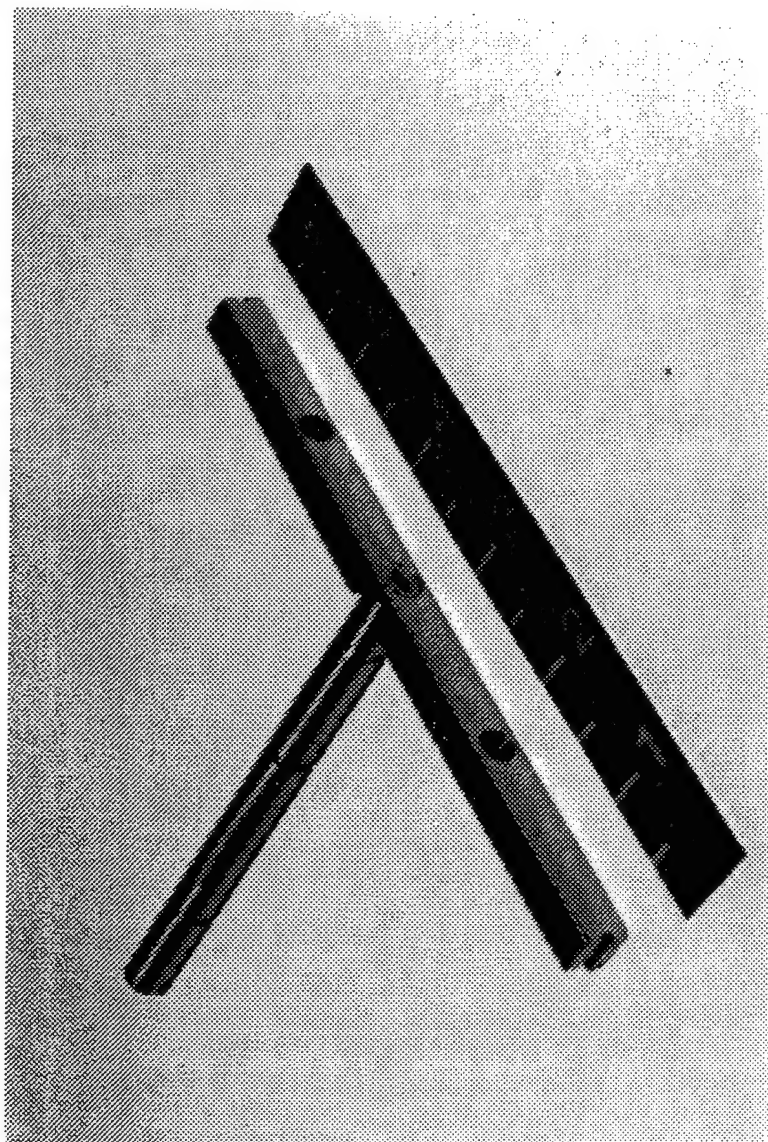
Nozzle and nozzle extension tube mounted in base retainer plate.
